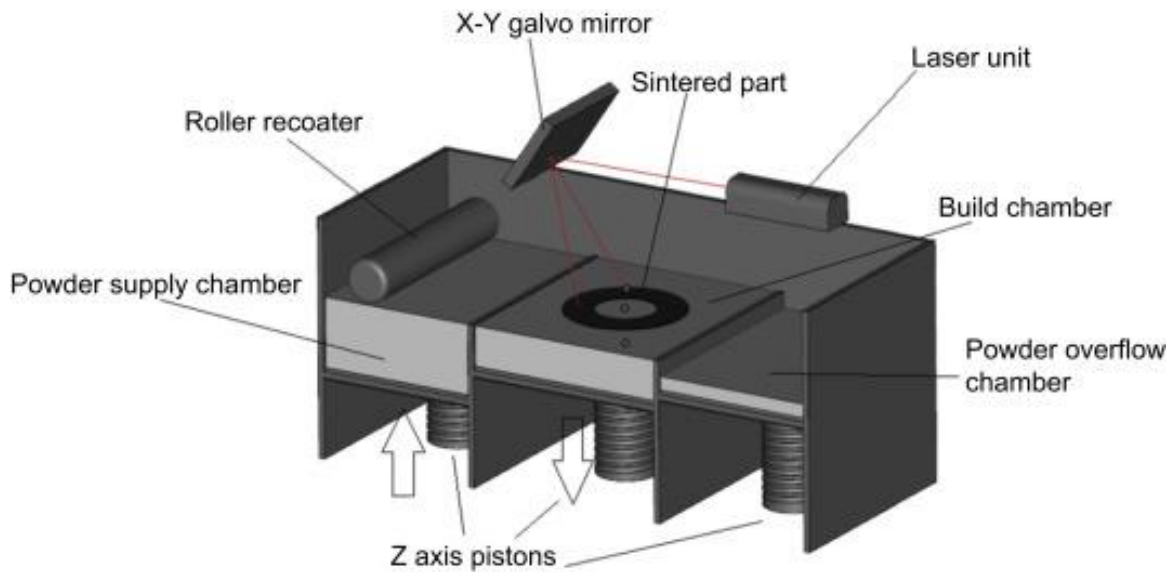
Diagram showing the Laser Sintering (LS) process [13].
